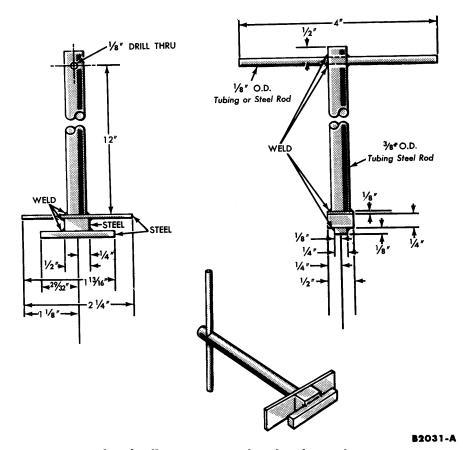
Fuel Tank Filler Pipe Removal Tool—Fabricated
